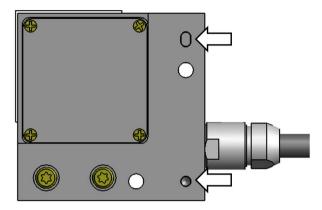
Holes for the locating pins on the bottom side of the P-616 for aligning the P-616
